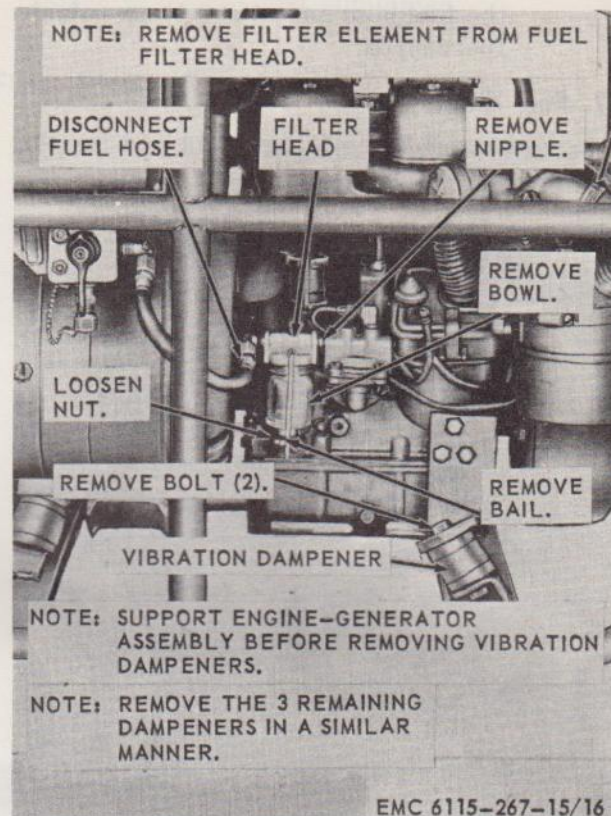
Fuel filter and vibration dampeners—removal and installation.
